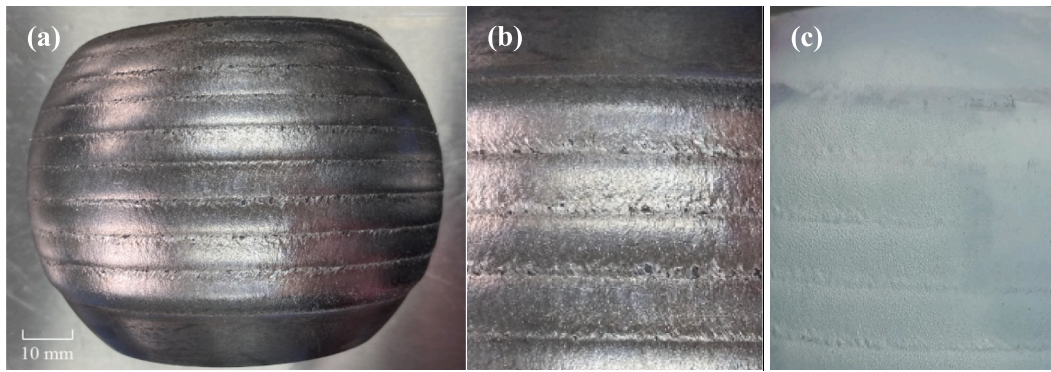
Liquid dye penetrant test with color indication for cracks inspection. Surface photographs of (a) cladded ball valve, (b) before and (c) after test. No cracks are found in the cladding layers.
